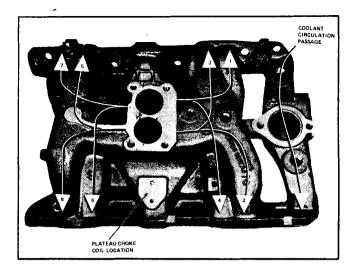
Two Barrel Carburetor Intake Manifold - Typical
